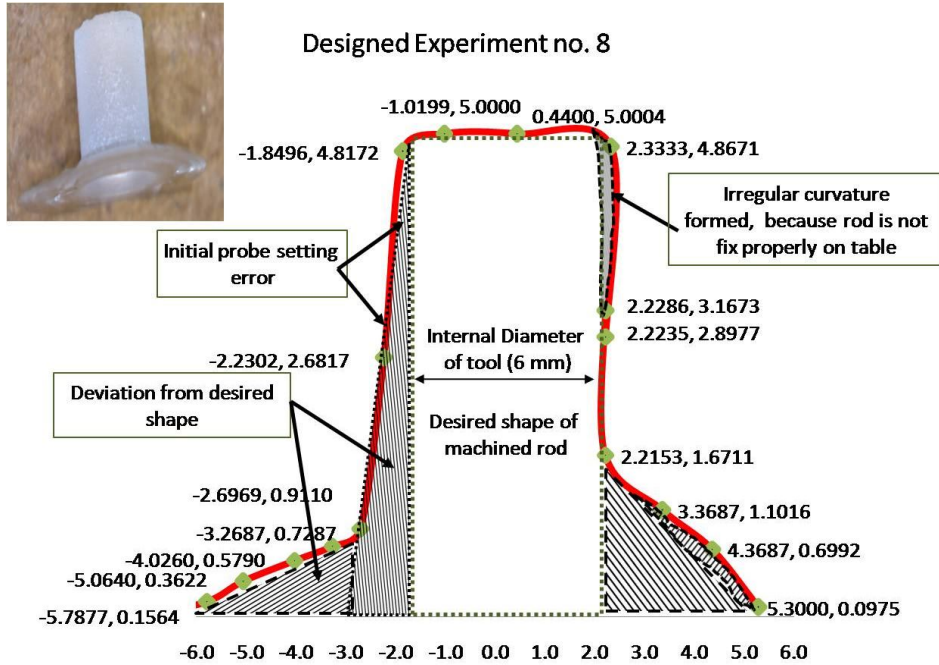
Trace of a machined rod produce by CMM, Inset: Actual machined rod
